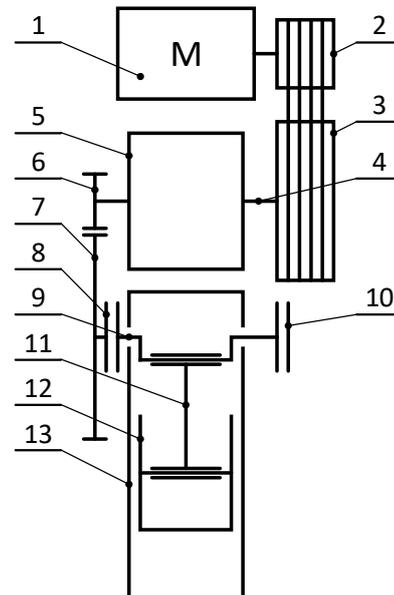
Diagram of typical crank forging press drive (1 – Electric motor; 2 – Drive pulley of motor; 3 – Drive pulley of countershaft; 4 – Countershaft; 5 – Flywheel; 6 – Pinion of countershaft; 7 – Gear wheel of clutch; 8 - Clutch; 9 – Crank shaft; 10 - Brake; 11 – Connecting rod; 12 – Ram; 13 – Press frame)
